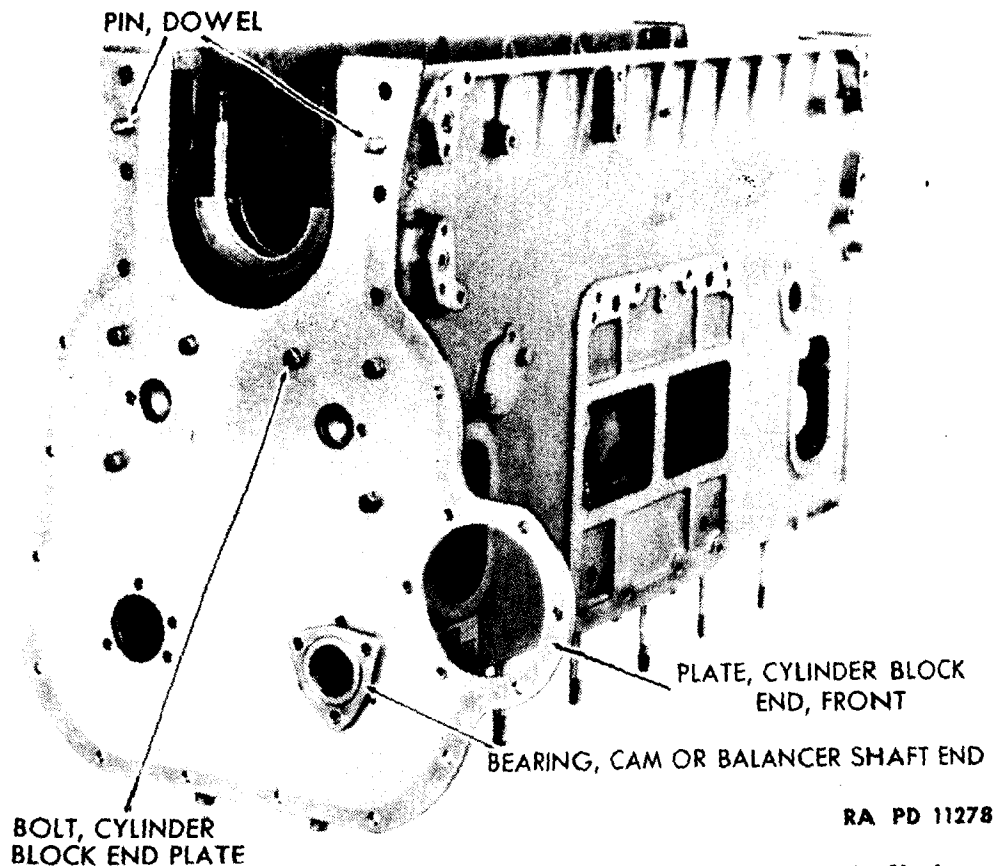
Camshaft Bearing Being Used to Line Up Cylinder Block Front End Plate
